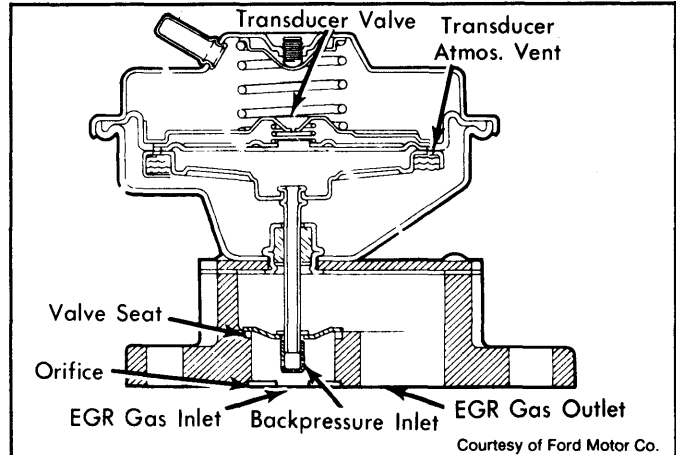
Integral Type Backpressure Transducer & EGR Valve
